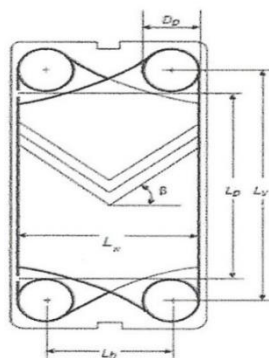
Main dimensions of chevron plate for the projected Gasket Plate Heat Exchanger
